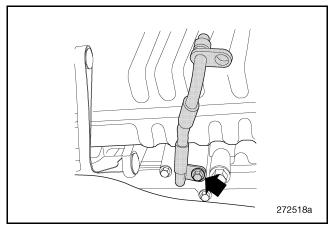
Oil Supply Line Retainer Screw at Filter Housing
